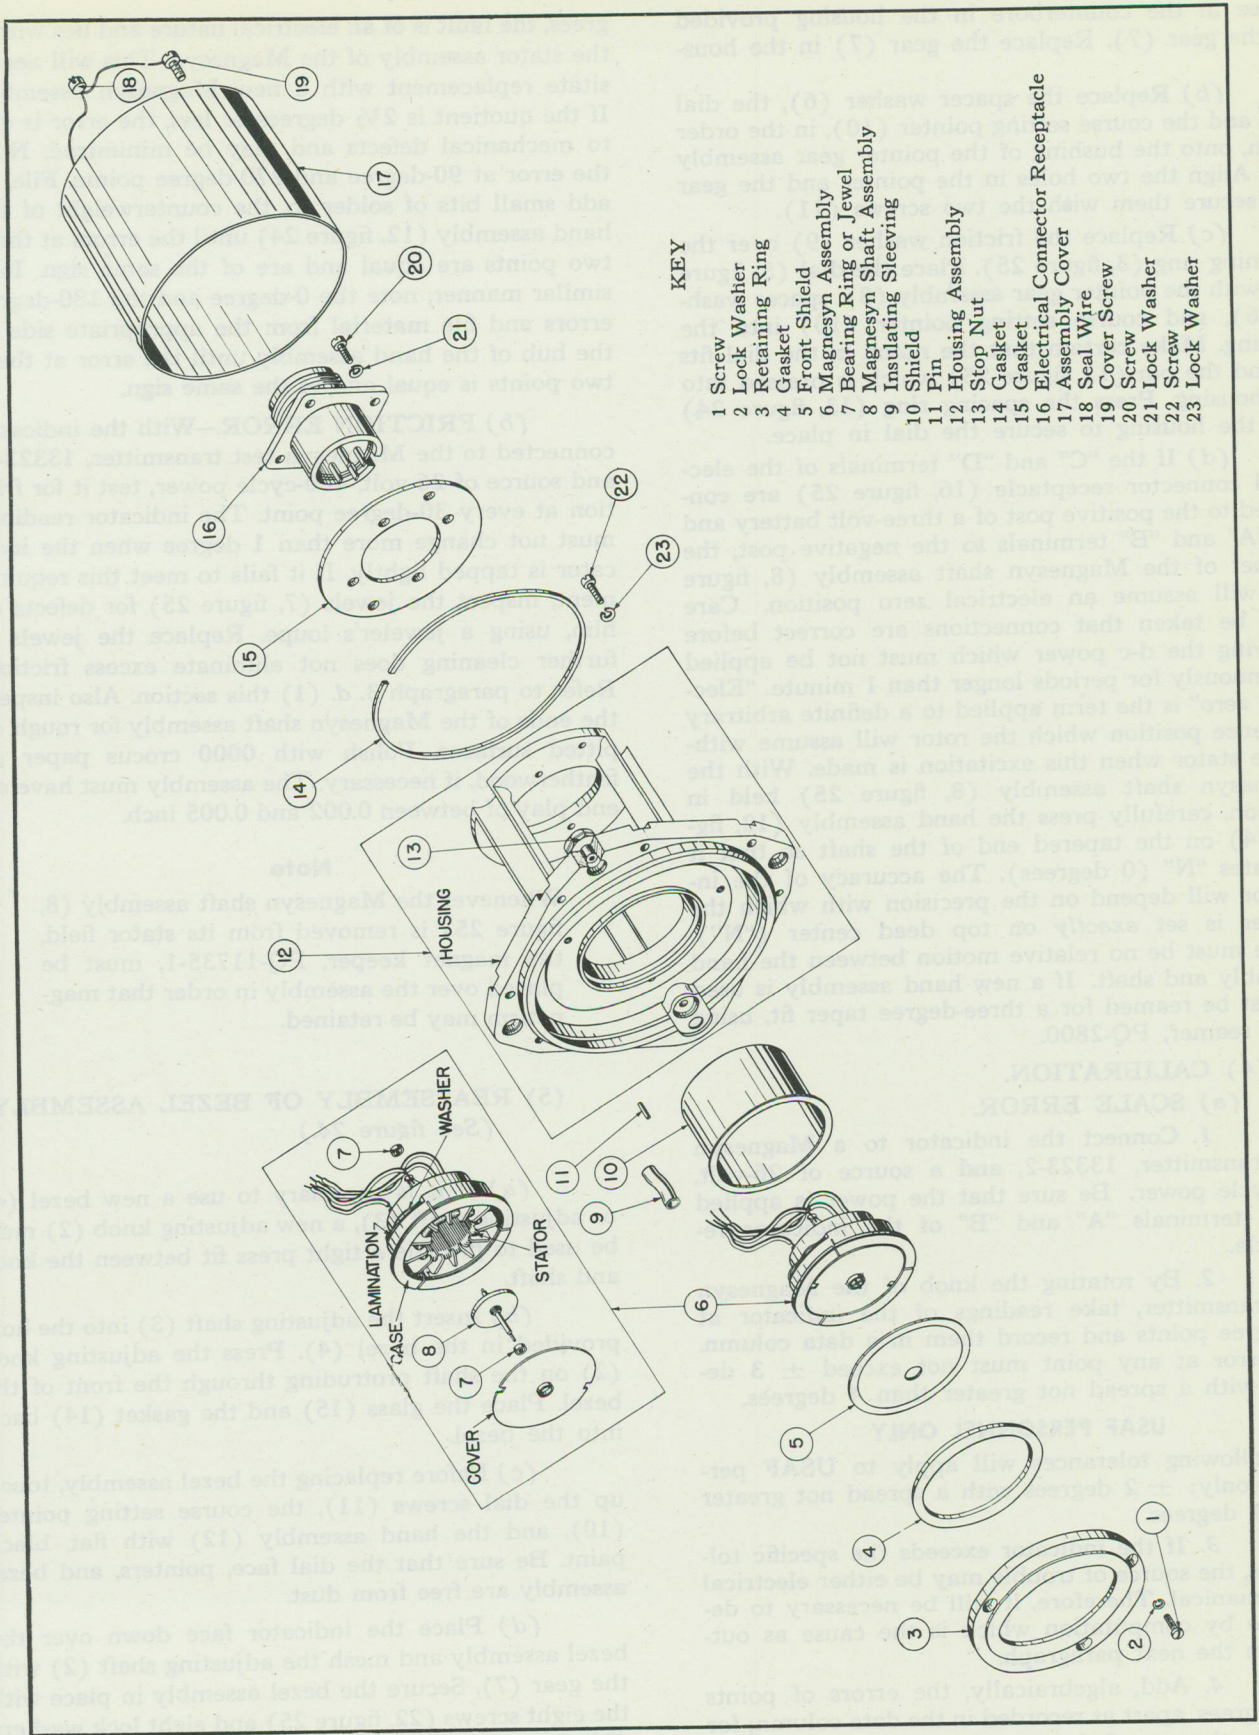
Exploded View Drawing—Main Assembly—Indicator—Types AN 5730-2A and AN 5730-6 (Pioneer Types 10061-B1), and Navy Stock No. R88-1-801-11 (Pioneer Type 10098-1AL-A1)
